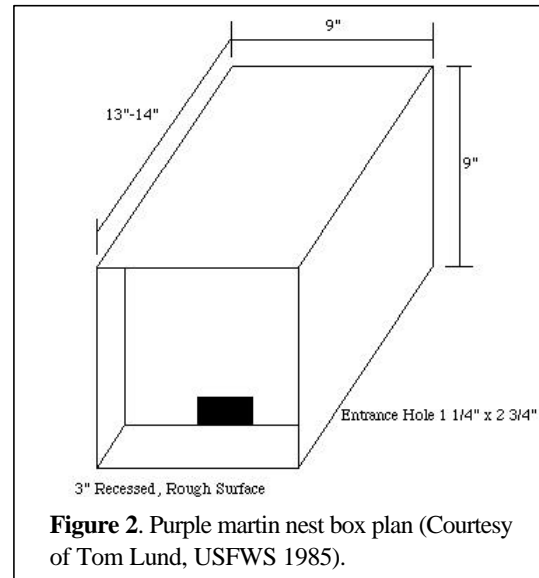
Purple martin nest box plan (Courtesy of Tom Lund, USFWS 1985).
